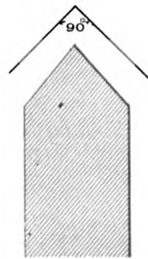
Section to Which the Emery Wheel Should be Dressed for Proper Grinding.
